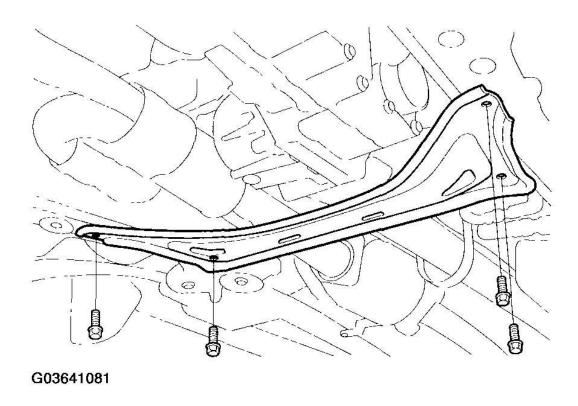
Removing Front Suspension Subframe Stiffener Plate Courtesy of AMERICAN HONDA MOTOR CO., INC.
